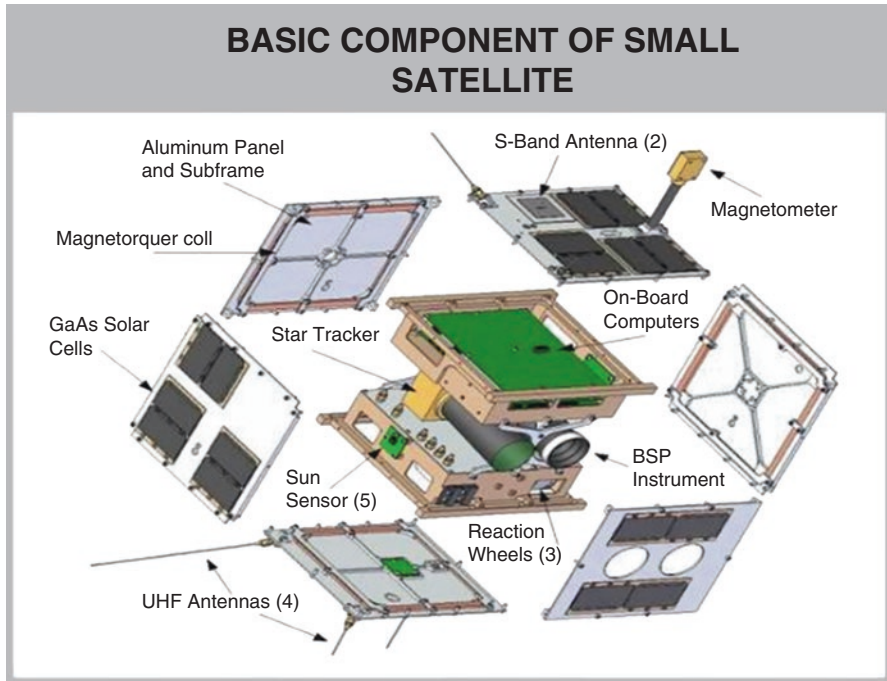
Key component parts of an integrated cubesat shown in exploded form. (Graphic courtesy of UTIAS/SFL)
